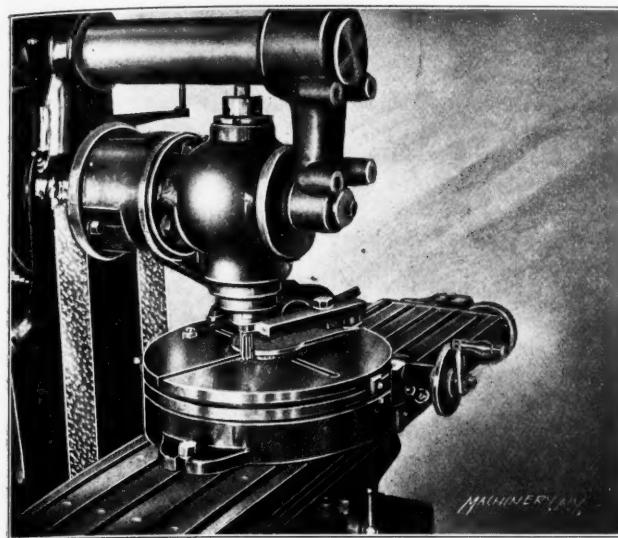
Use of the Circular Milling Attachment in Finishing Straight and Circular Surfaces.
